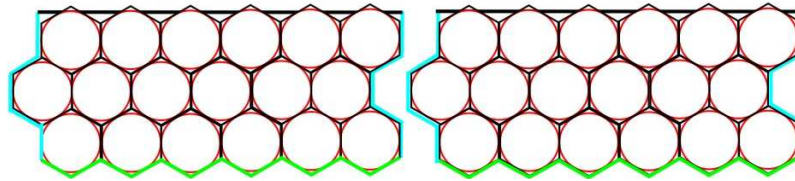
The parted strip and cut out elements arrangement for cutting with hairpin bends view [7]
